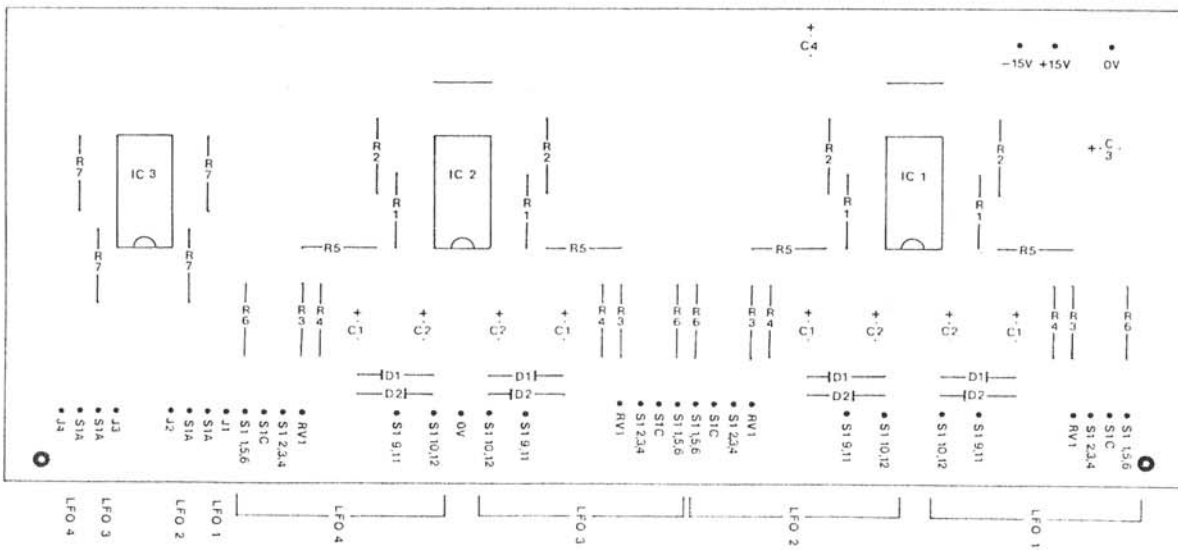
80-23 PCB COMPONENT LAY-OUT
